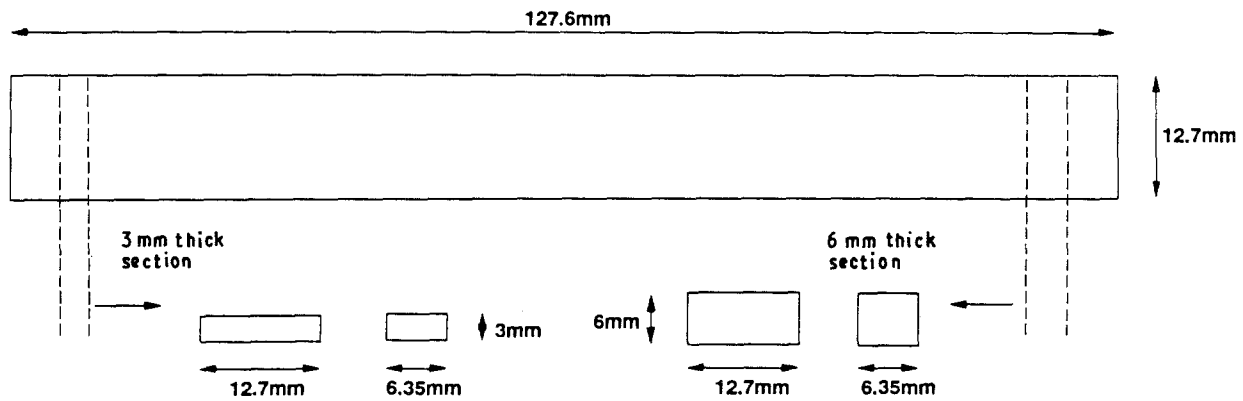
Dimensions of injection-moulded test bars and specimens used for binder removal experiments.
